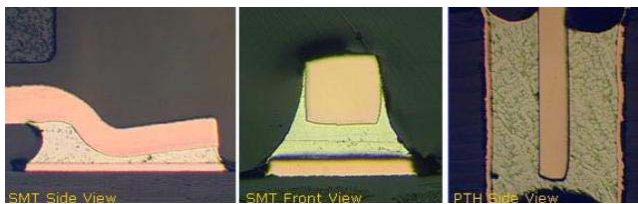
Representative Mictor SMT and PTH soldered cross-sectioned joints.
